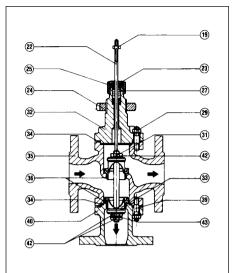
Model 26 three-way diverting valve body (with outlet adaptor)
